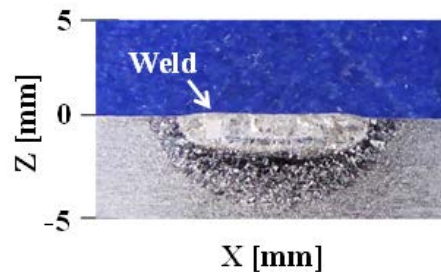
Cross-section photo of after 3 min welding.
